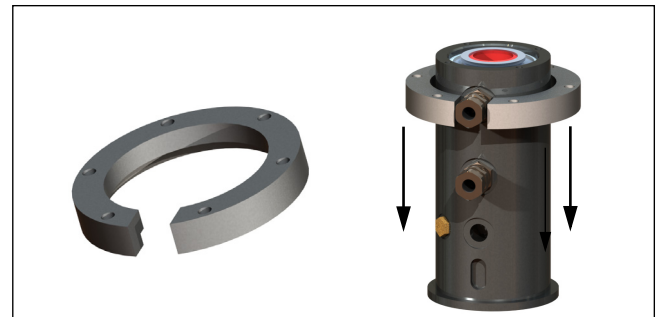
Slit mounting flange for Safety Catchers with compressive load direction (series K, KR and KRP)
